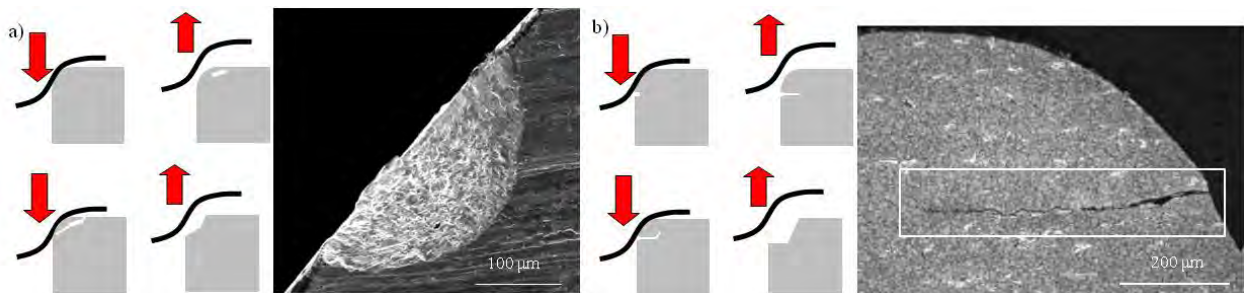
Fracture by fatigue: a) when cracks are nucleated at the subsurface and grow to come to the surface and b) cracks initiated at surface flaws propagate inwards
